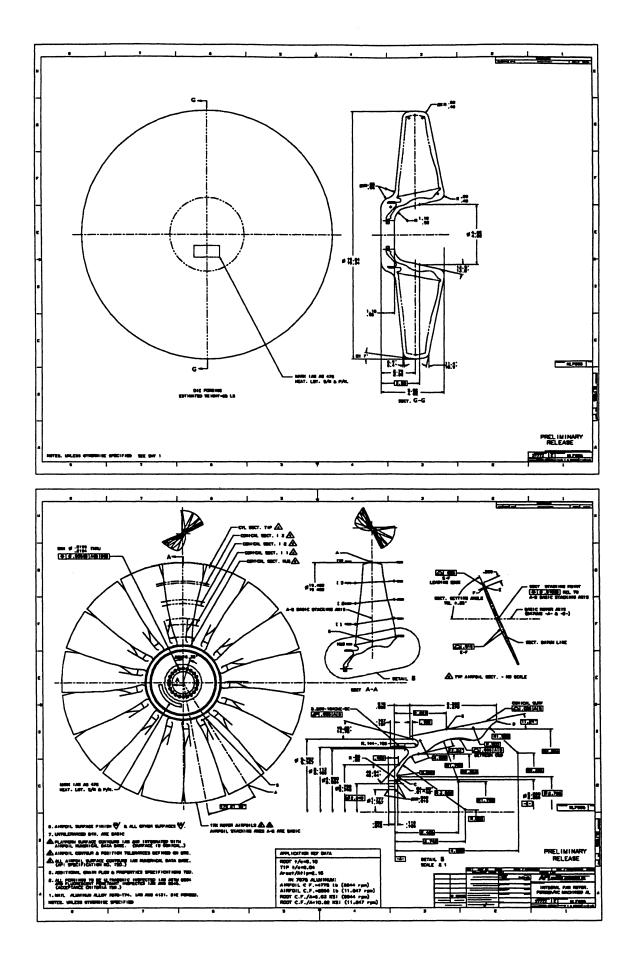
Forged aluminum, NC-machined blisk preliminary manufacturing drawing.
